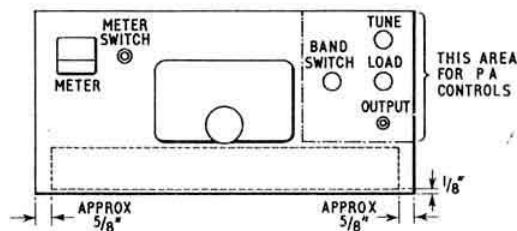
After the v.f.o. tuning capacitor (VC1) has been fitted the v.f.o. box should be mounted so that the extension shaft from VC1 clears V5 and V6. The Eddystone dial should be mounted to mate with shaft. The layout can be seen on the upper photograph on Page 643 of the October issue of the *Bulletin*. Suggested positions for the p.a. controls and the meter are shown above.
